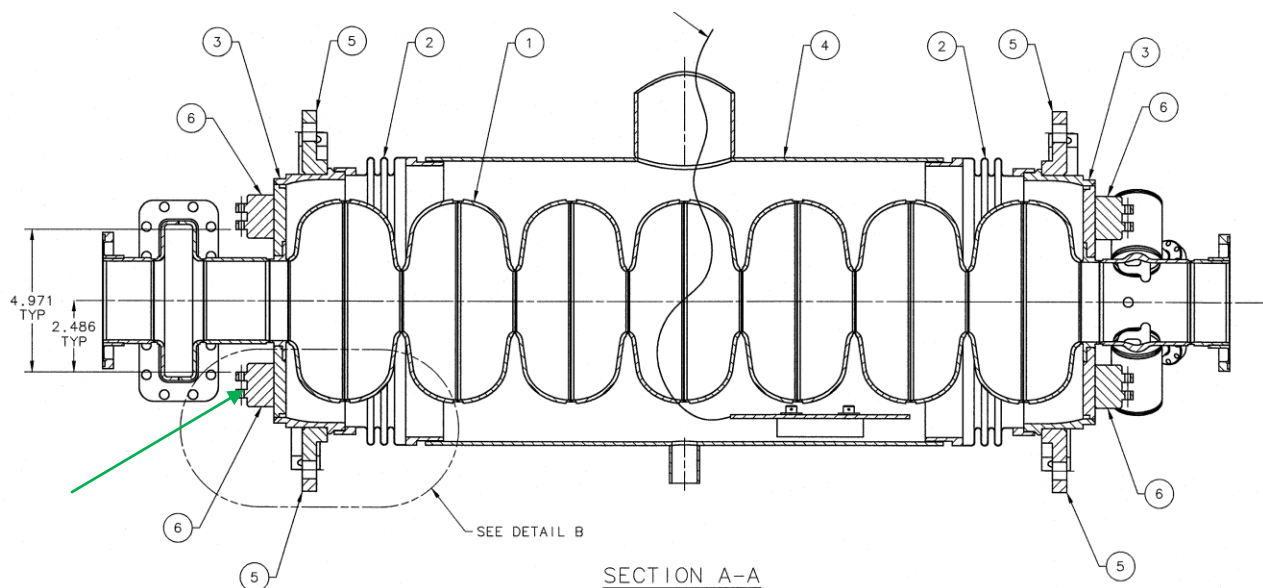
Cross section of a completed C100 He Vessel with Stainless Steel Vessel Head
